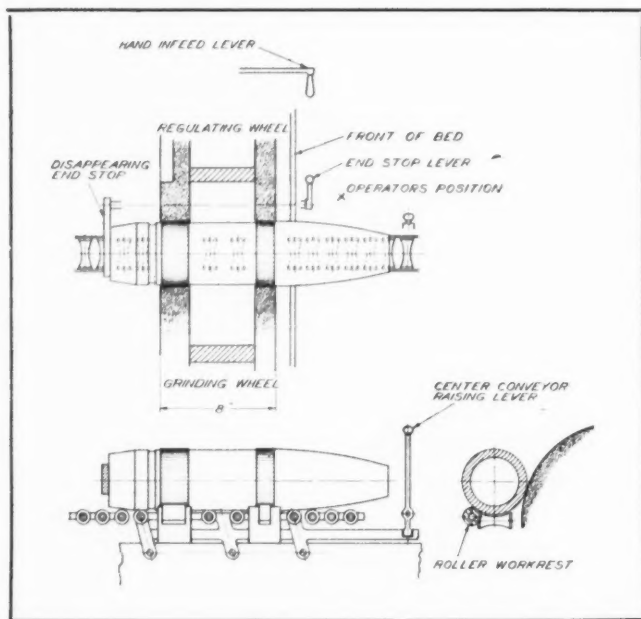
Loading and Work Supporting Unit Used for Heavy Shells Such as Shown in Fig. 12
